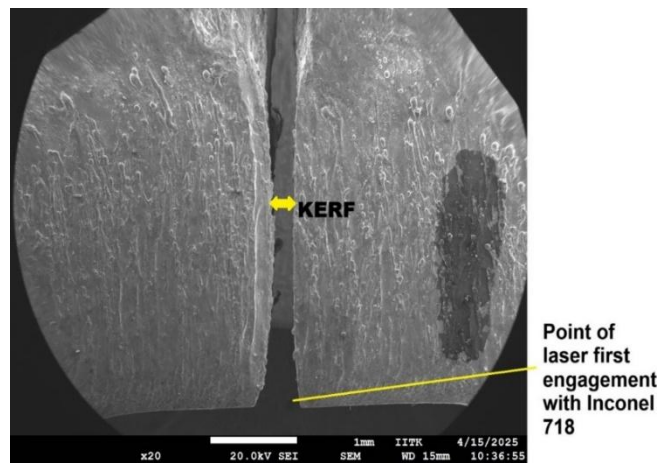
Illustration of kerf and the point of laser first engagement with the workpiece.
